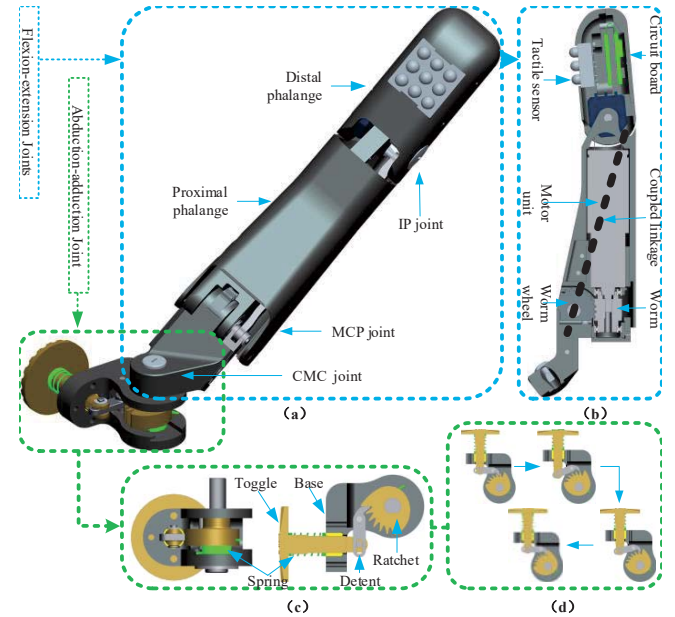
Thumb mechanism. (a) The thumb appearance; (b) The components of the thumb; (c) The components of the CMC joint of the thumb; (d) The mechanism of the passive joint.
